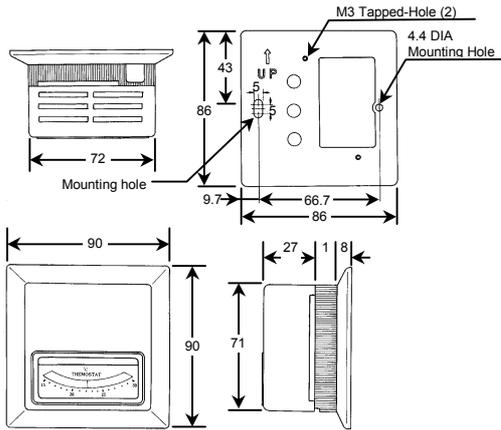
Dimensions in mm.-with baseplate and mounting plate model
